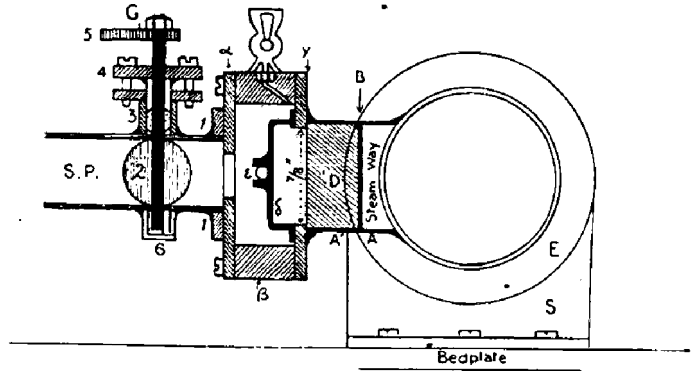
TRANSVERSE SECTION OF CYLINDER, VALVE BOX, AND GOVERNOR VALVE.
